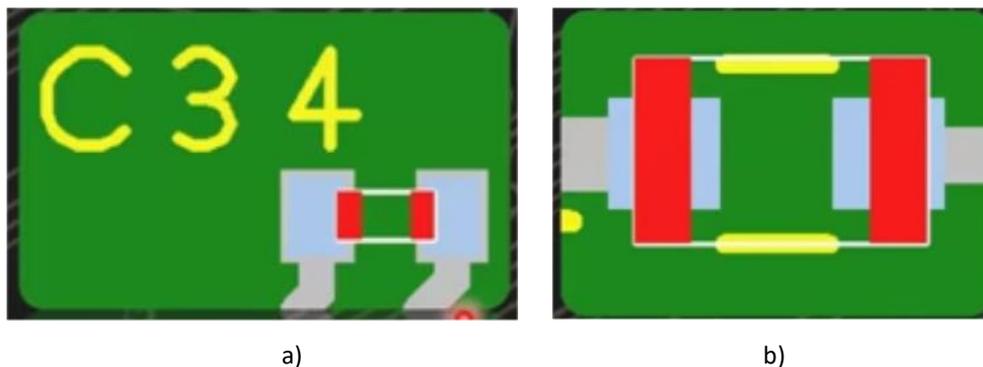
a) 0402 chip component placed on a 0603 PCB footprint; b) 0805 chip component placed on a 0603 PCB footprint
